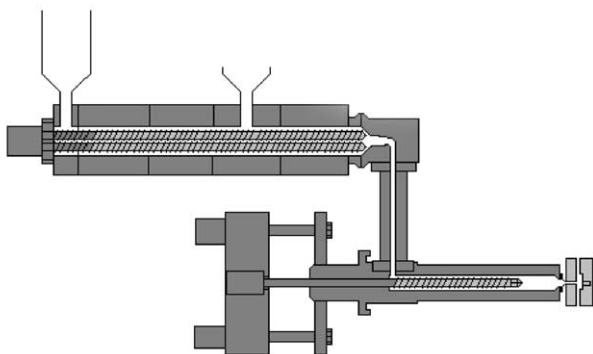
Schematic diagram of the compounding injection moulding equipment combining a twin screw extruder with an injection moulding unit.
